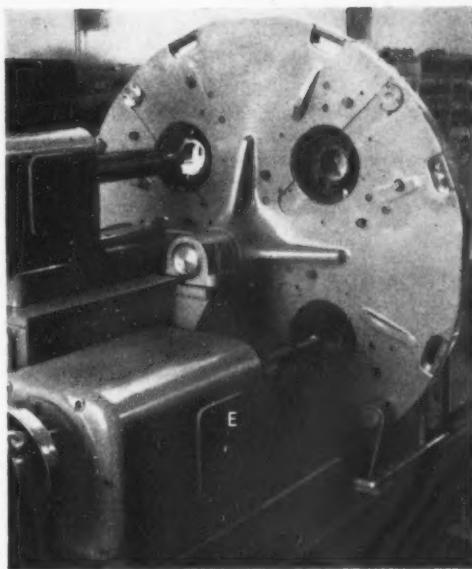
Rear View of the Unit-head Machine for Boring and Facing Mining Truck Wheels
